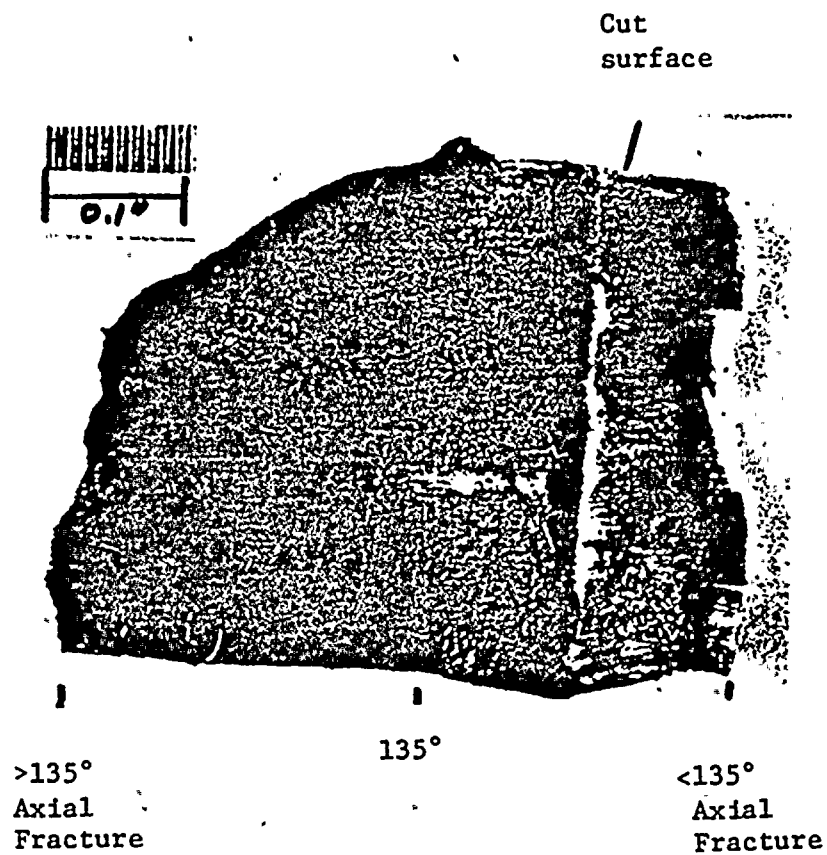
Fractography was performed on two axial fracture surfaces 1-1/2" from the bottom of the top portion of Tube R44-C55
